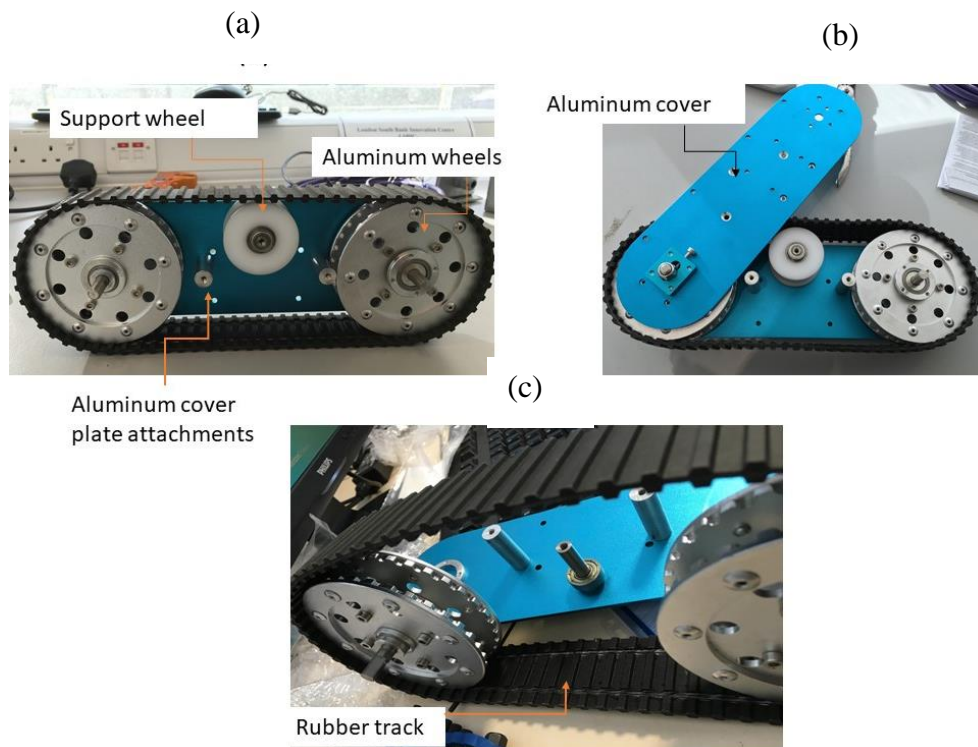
(a) and (b) prototyped tracked wheel unit; (c) rubber tracked-wheel set
